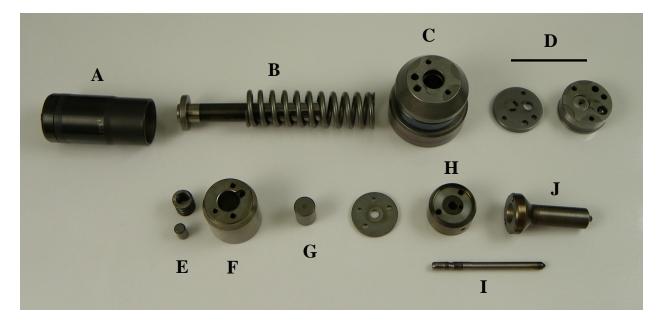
C7 HEUI Injector Barrel Assembly Exploded View
